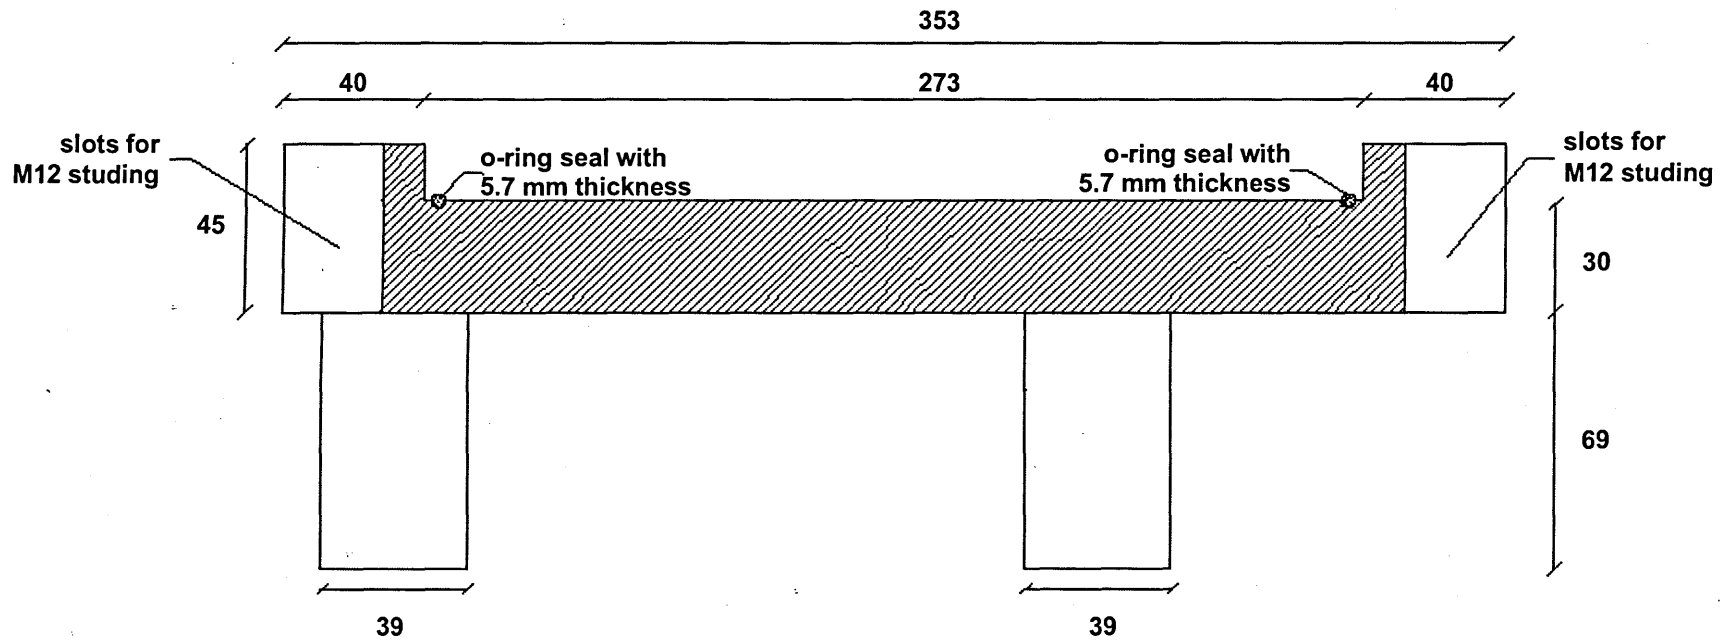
Elevation view for bottom base (sockets, ports and locating sockets not shown; all dimensions in mm, not to scale)
